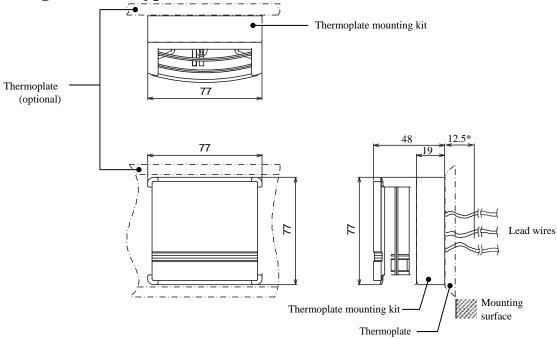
Mounting dimensions (mm): Neosensor with Thermoplate mounting kit on Thermoplate
